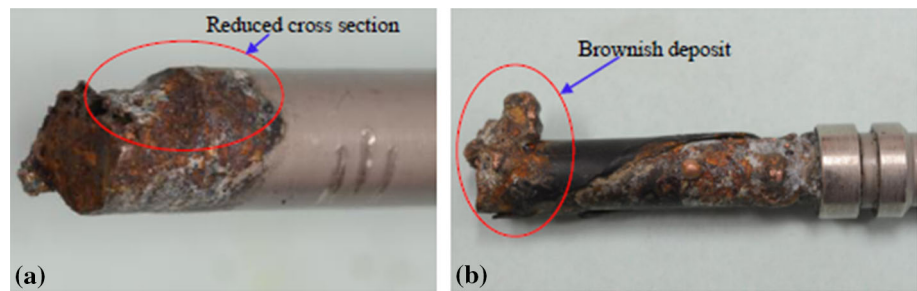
Magnified views of as-received failed copper conductor rod surfaces 1 and 2
